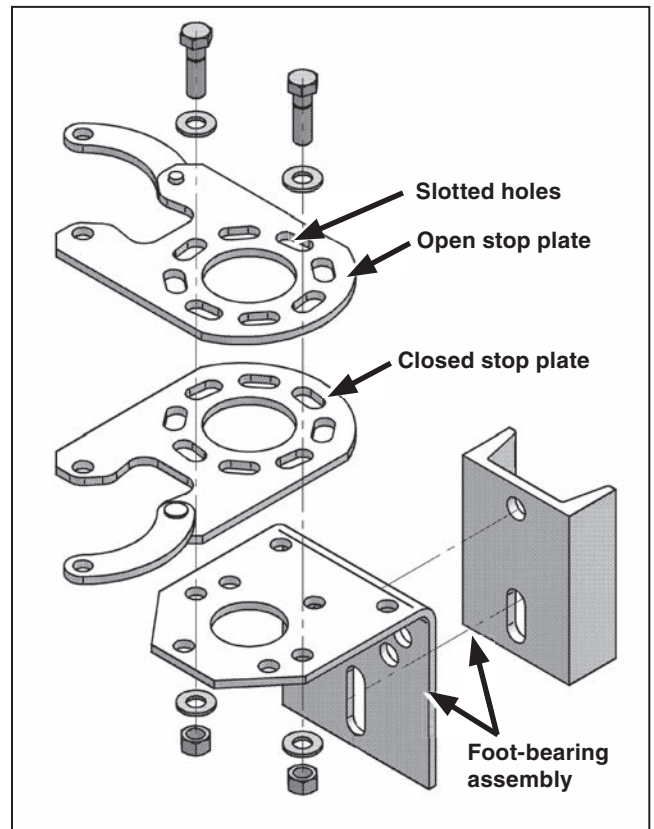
Stop plates and foot-bearing assembly—exploded view.
